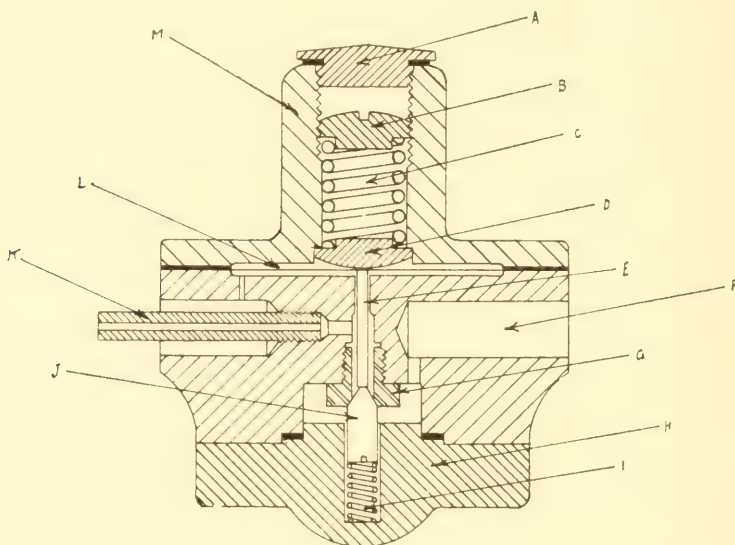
CROSS SECTION ALCO LIQUID CONTROL VALVE.
